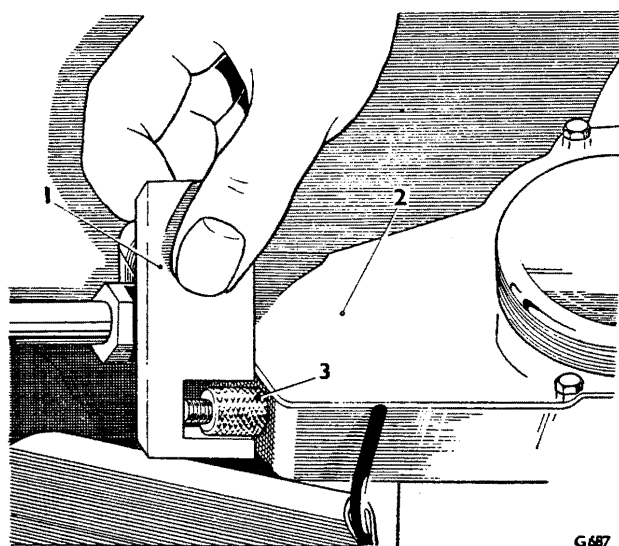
WIPER MOTOR PARKING SWITCH SETTING
